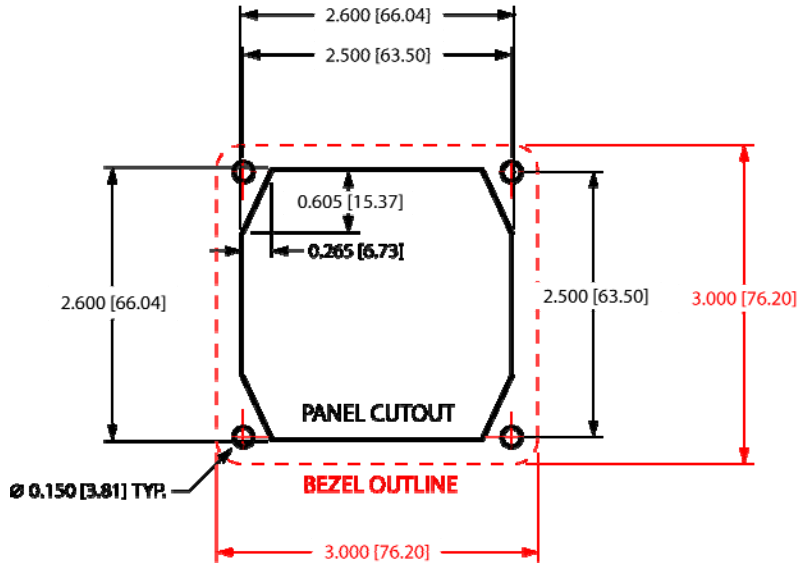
1Touch, 4 position installation dimensions in inches [millimeters].
